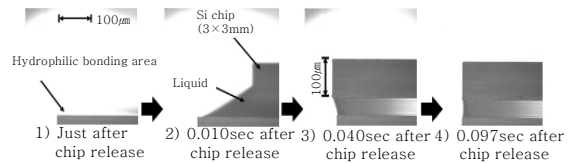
Magnified cross-sectional view of a self-assembling chip to a bonding area
